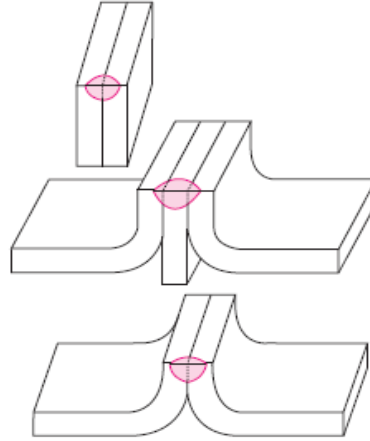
Common edge weld joint designs that may be used in fabrication.
